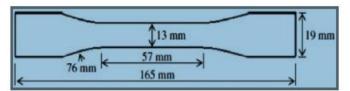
(b) The dimensions of the tensile test specimen for matrix
